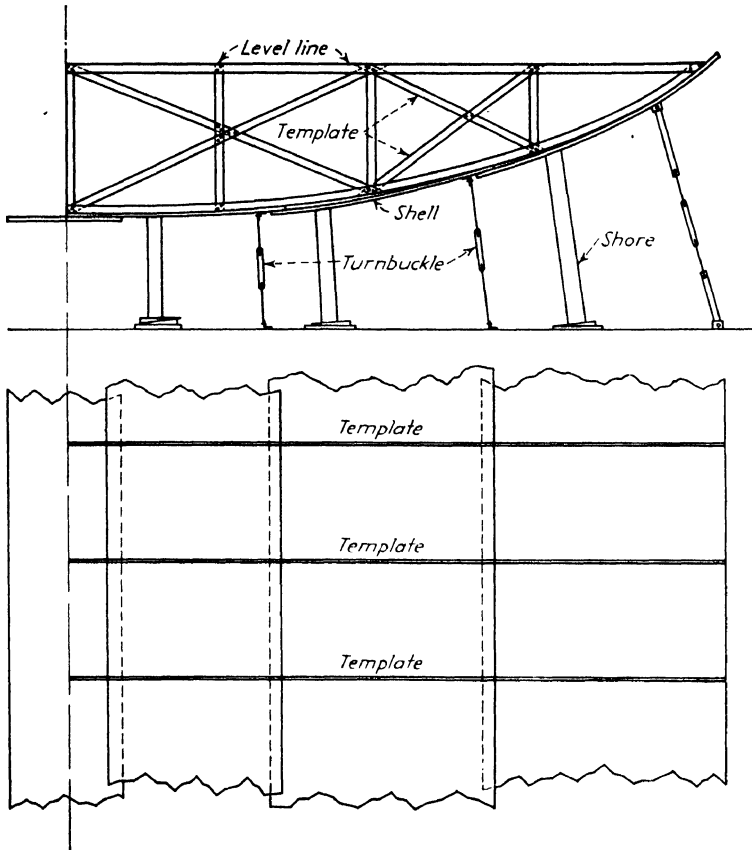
Use of template to check, and bracing to resist, welding distortion.
